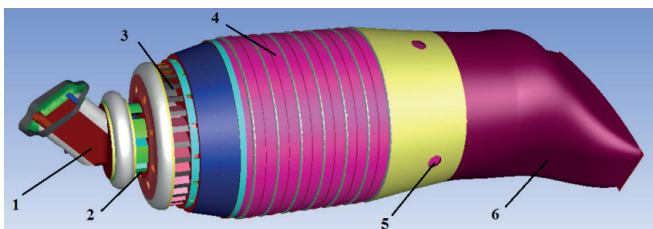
Flame tube design features: 1 – burner; 2 – inner swirler; 3 – outer swirler; 4 – cooled shells; 5 – dilution air holes; 6 – flame tube diffuser
